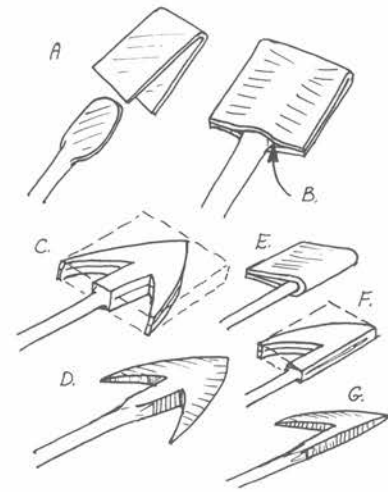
Fabrication of harpoon heads. A, a piece of folded sheet copper is slipped over the flattened end of a copper wire shank; fluxed, and soldered at point B. Epoxy can be used as a solder substitute. C, D, the shaping and finishing of a double-flued harpoon head; E-G, the forming of a single-flued harpoon head.
